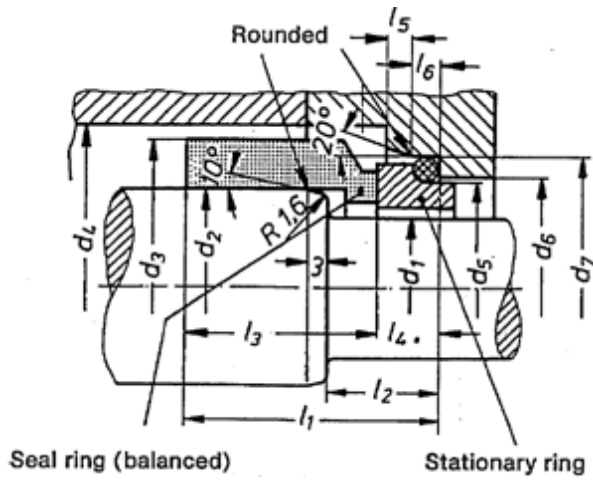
Single mechanical seal, arrangement B (balanced) according to EN 12756 former DIN 24960: 1992-06 (withdrawn)
